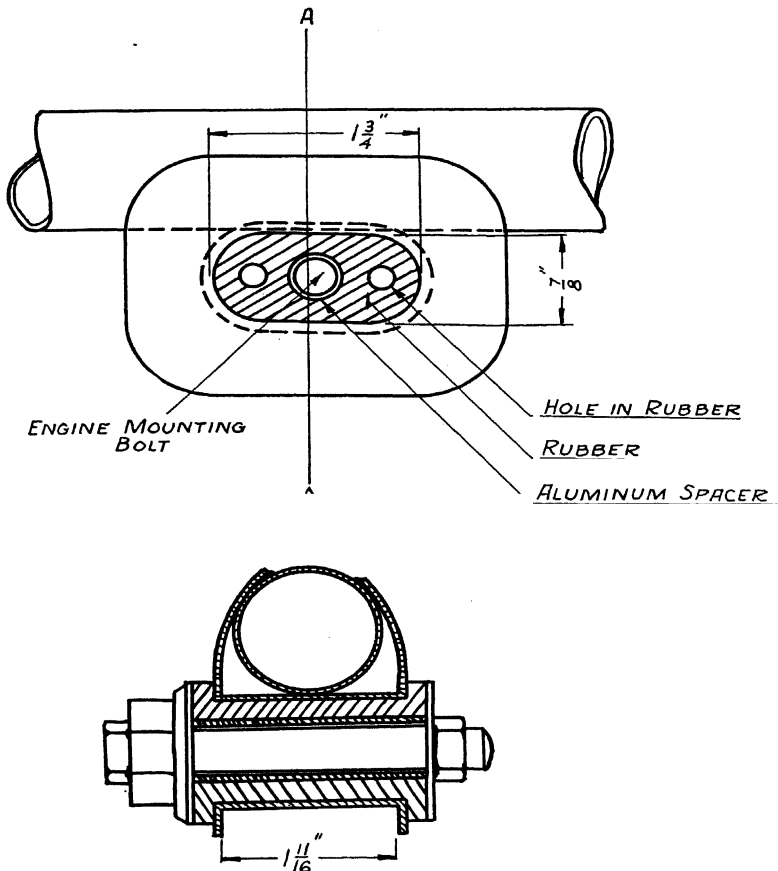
A. SUGGESTION FOR A RUBBER VIBRATION MOUNTING AT THE ENGINE MOUNTING RING
